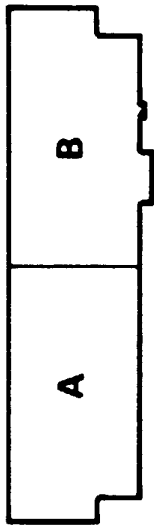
Memory I/O Data Converter Board Circuit Card Assembly (Sheet 2 of 2)
